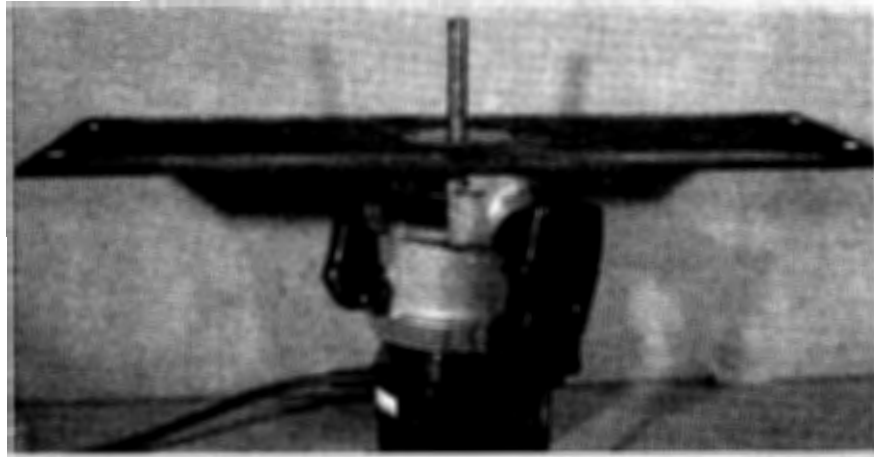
ASSEMBLY OF MOUNTING PLATE
